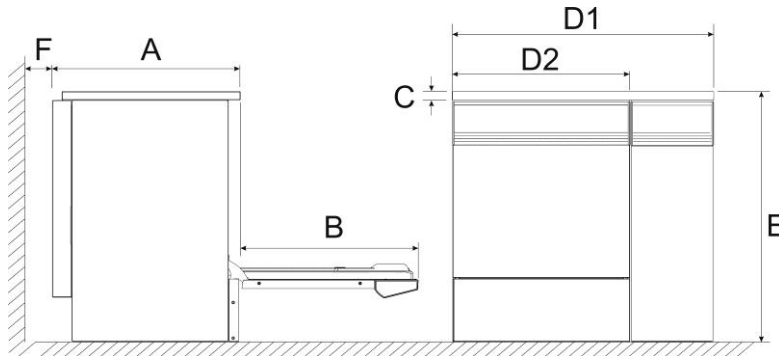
Schematic drawing GW4090 and WD5090 overall dimensions of the product 90CM.
